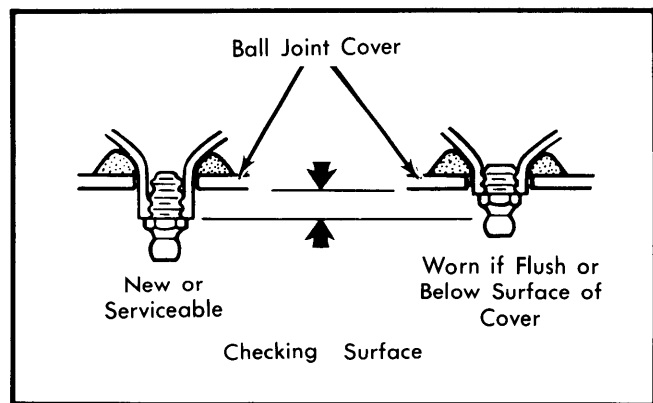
Checking Lower Ball Joint (Ford Motor Co.)
